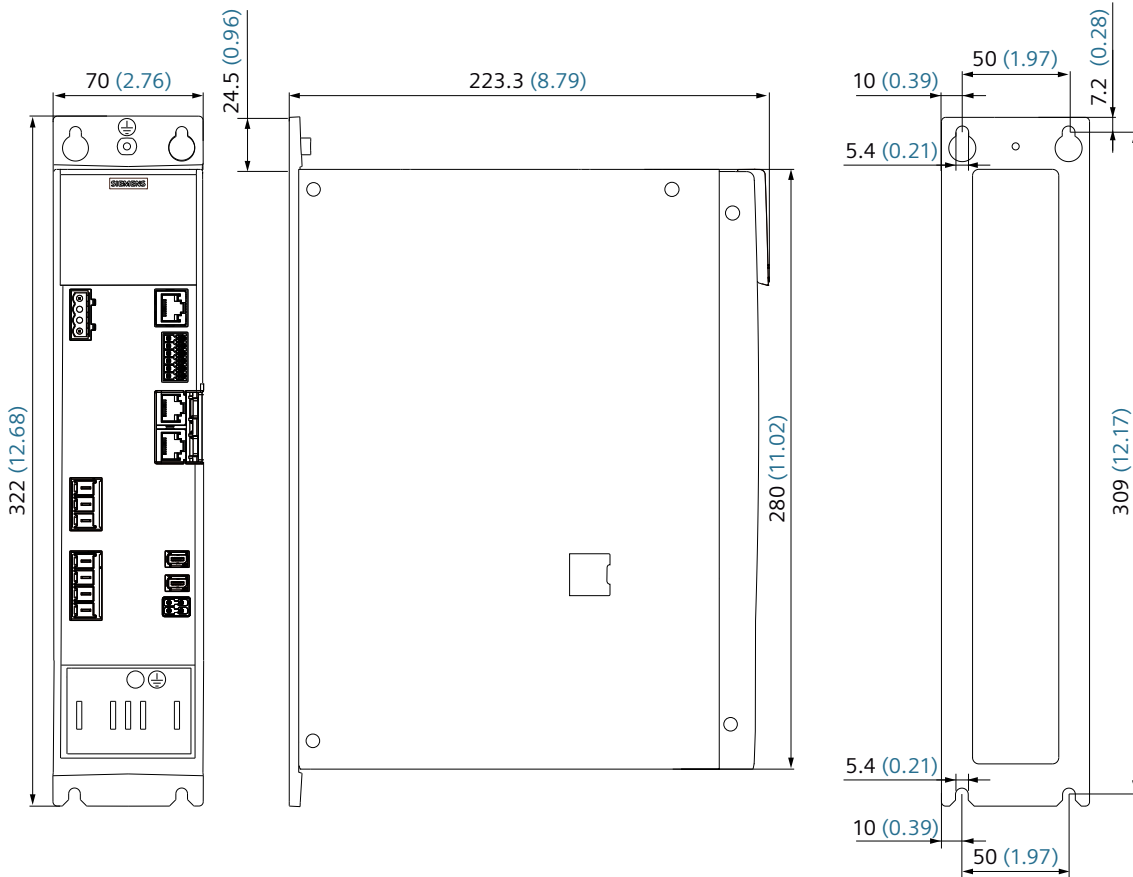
Dimension drawing SINAMICS S210 FSB, 3 AC, dimensions in mm (inch)
